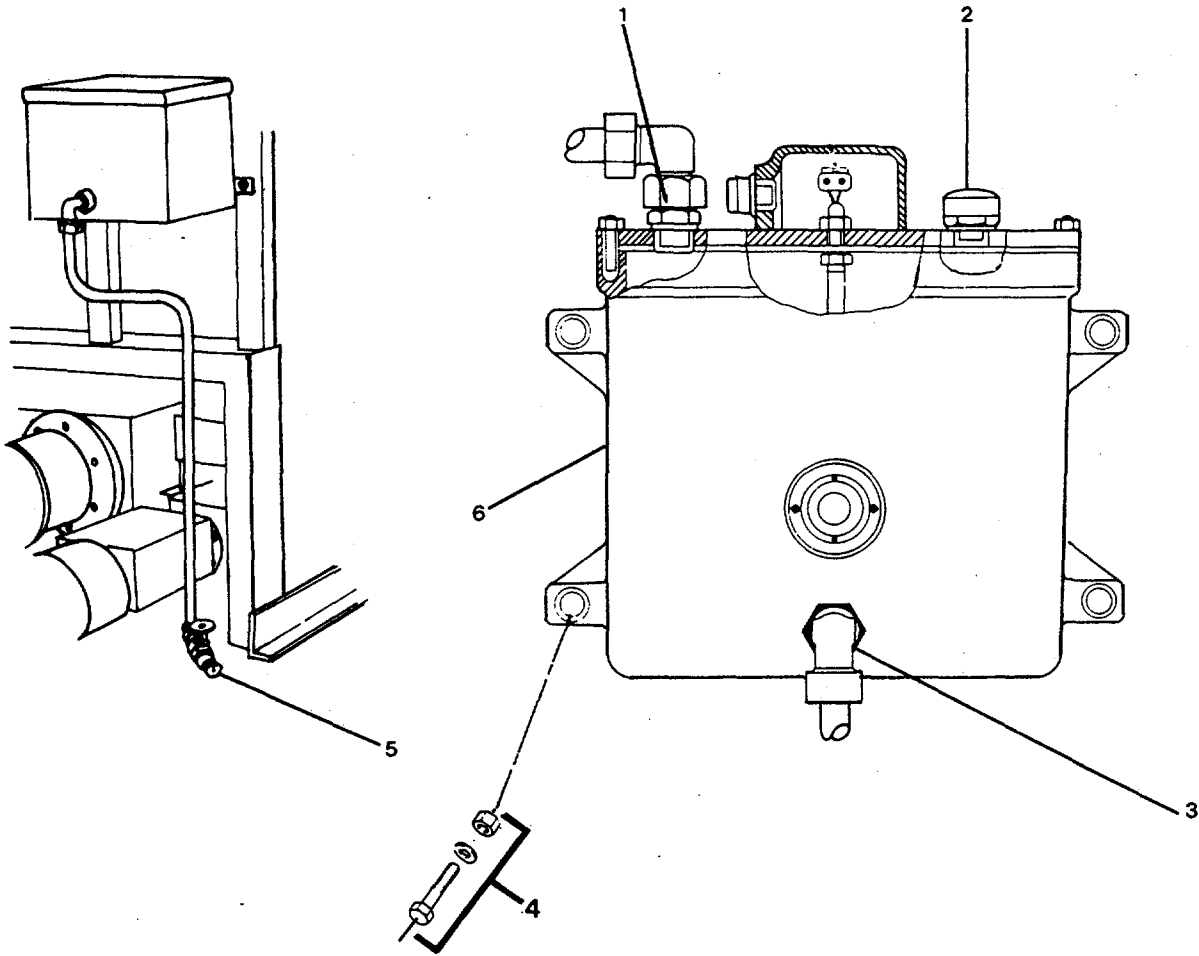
Lube Oil Tank Assembly (Sheet 1 of 2).
